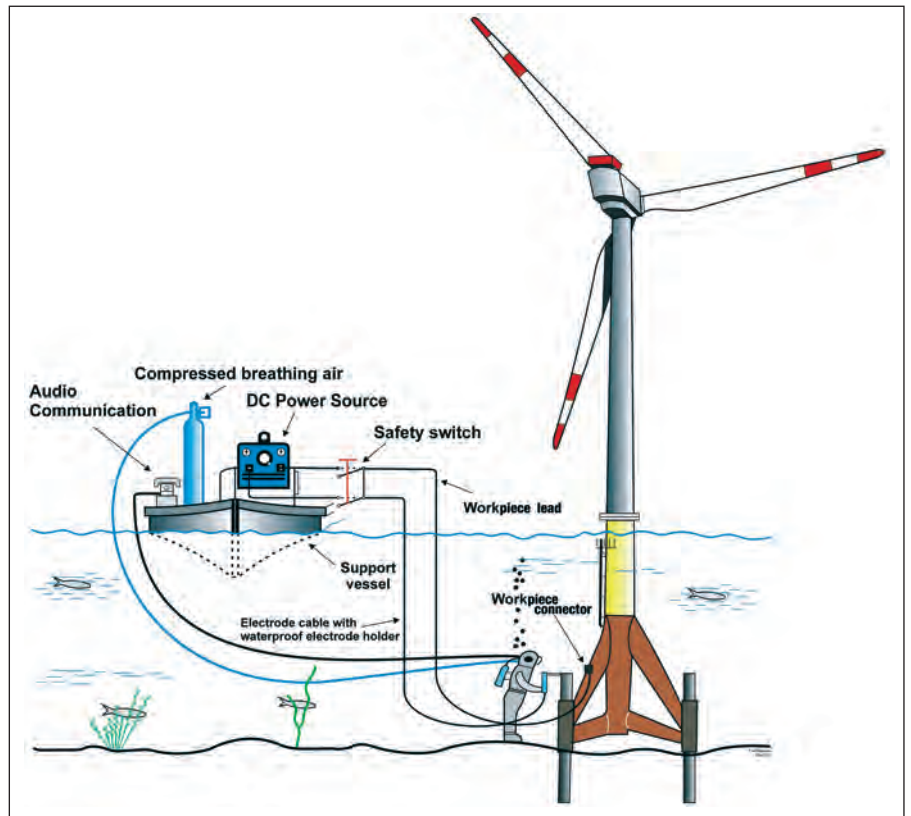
Overview of an underwater welding operation setup with equipment and support vessel. (Courtesy of Fred Neessen.)
